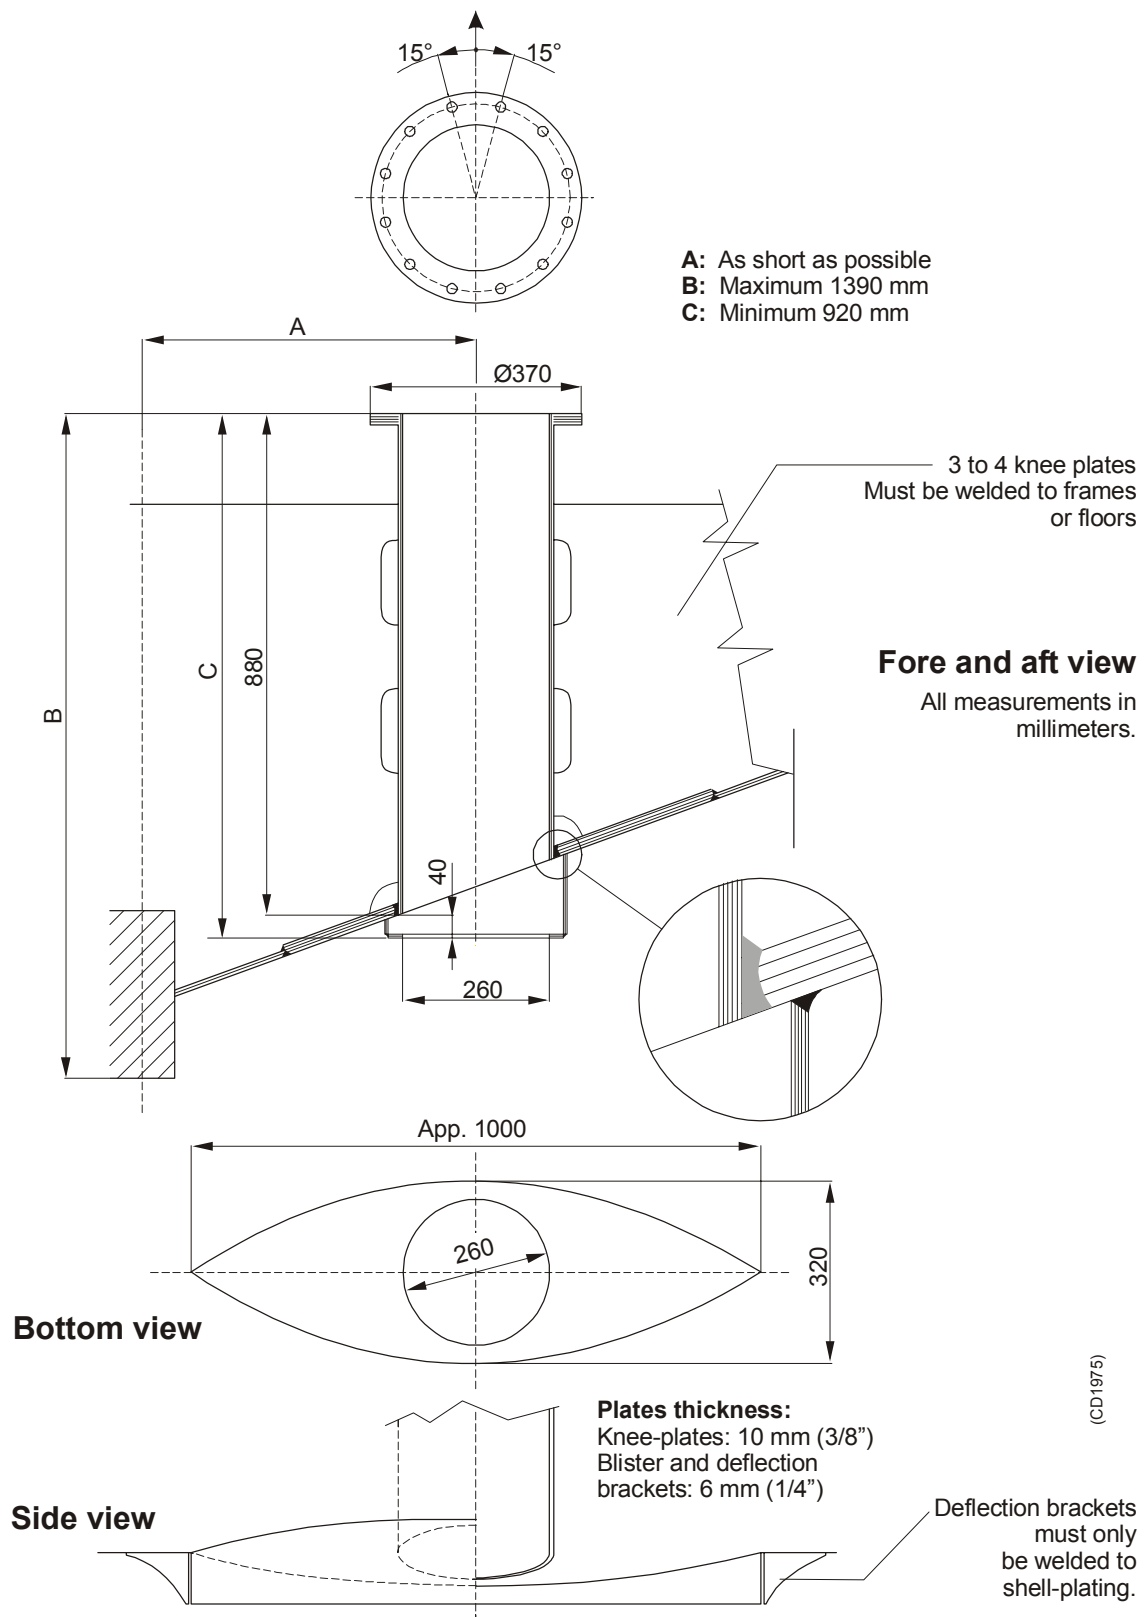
Installation of the SH80 trunk with open protection blister. No trunk extension.
